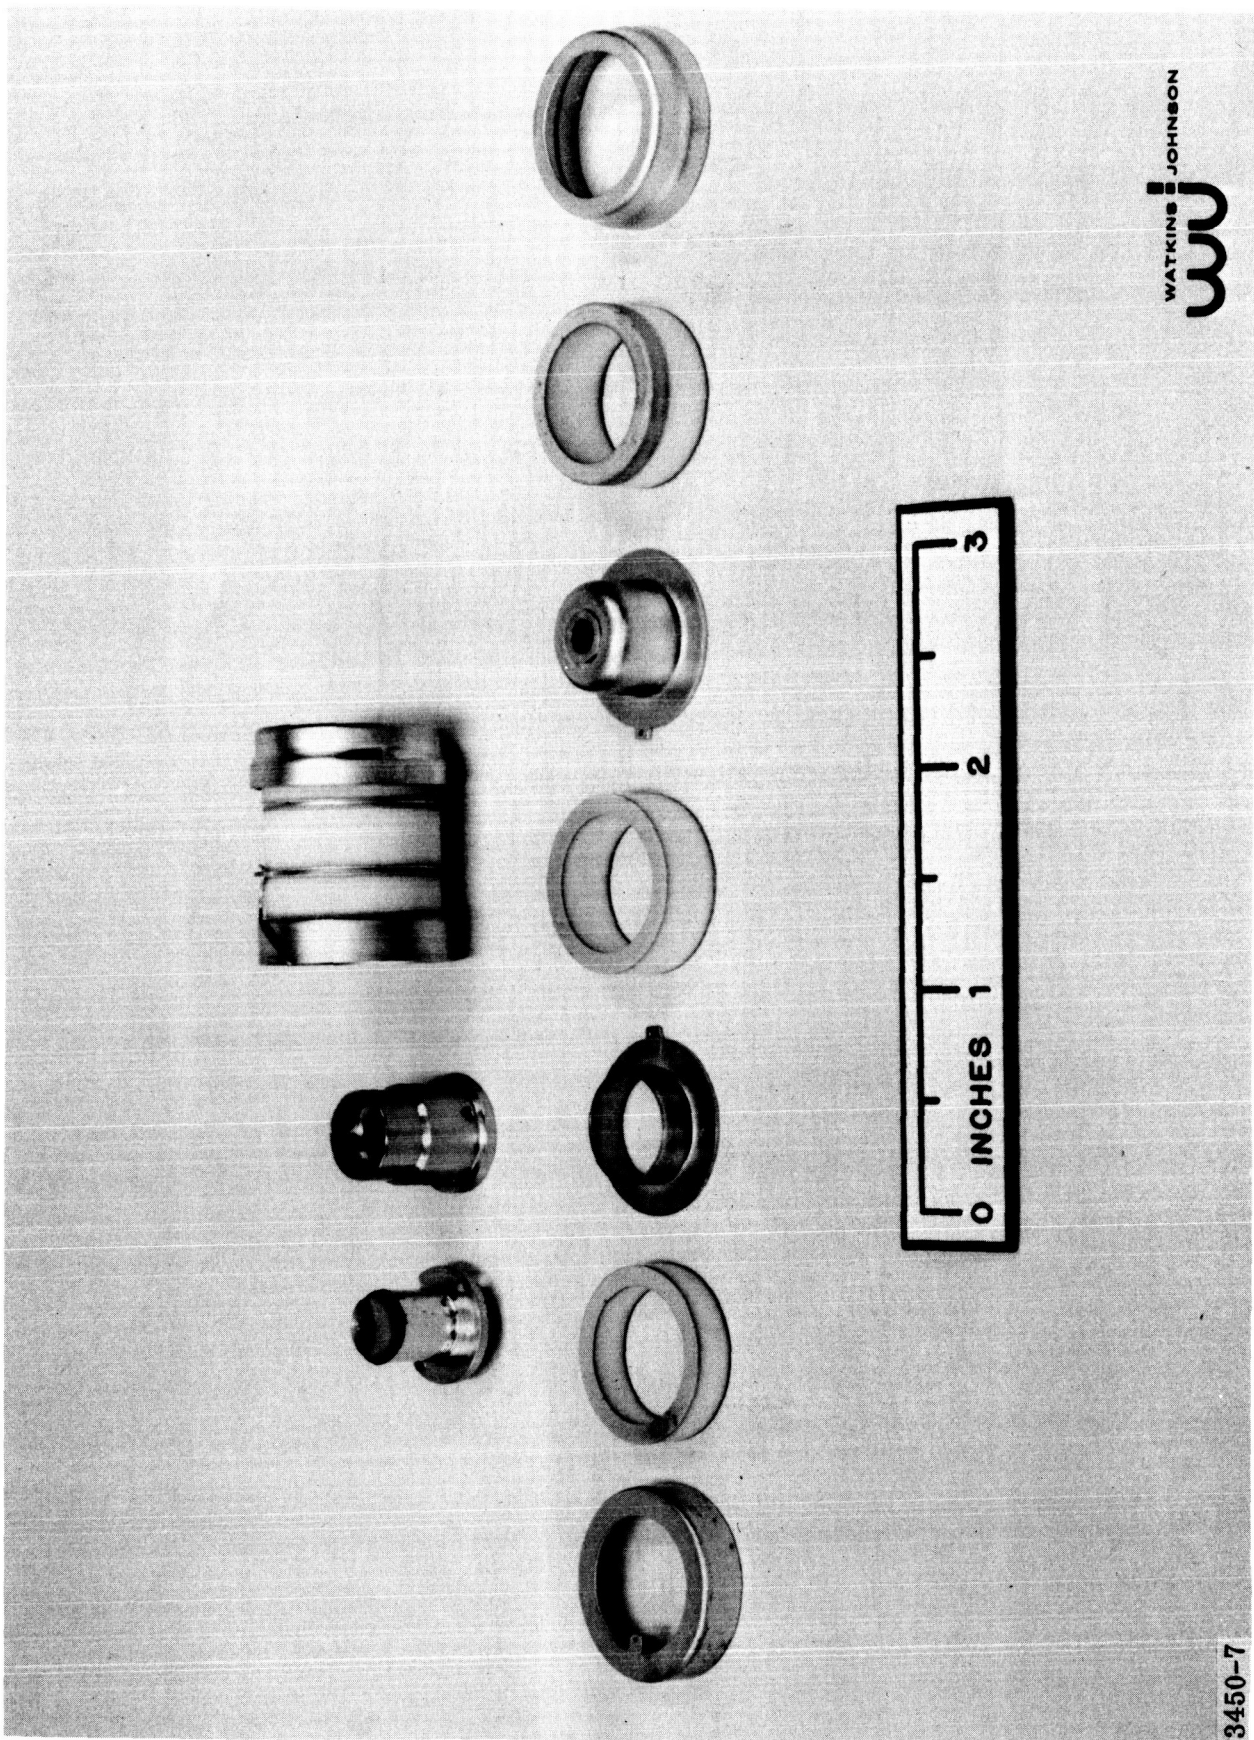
Photograph showing an exploded view of the electron gun subassembly. Foreground shows the metal-ceramic parts comprising the insulator, vacuum-envelope structure (right rear). The focus-electrode is at center rear and the cathode subassembly is at the left rear. See also Fig. 8 in Quarterly Report No. 1.
